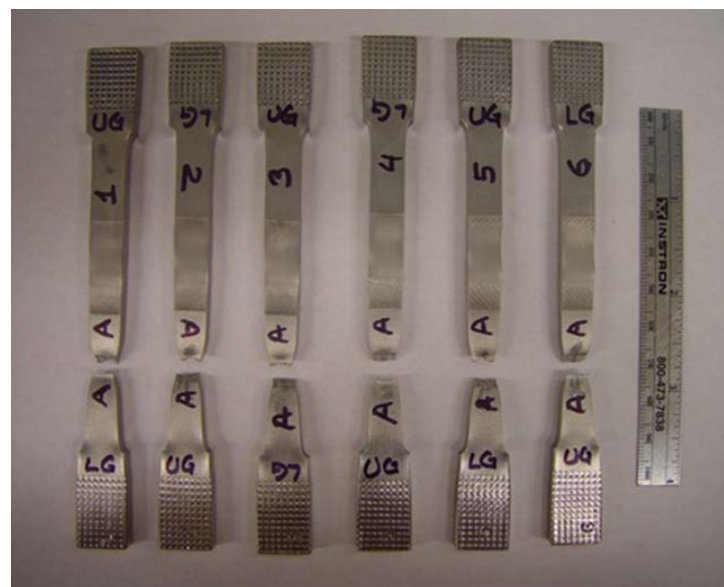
Transverse weld tension testing revealed all specimens failed in the base metal.
